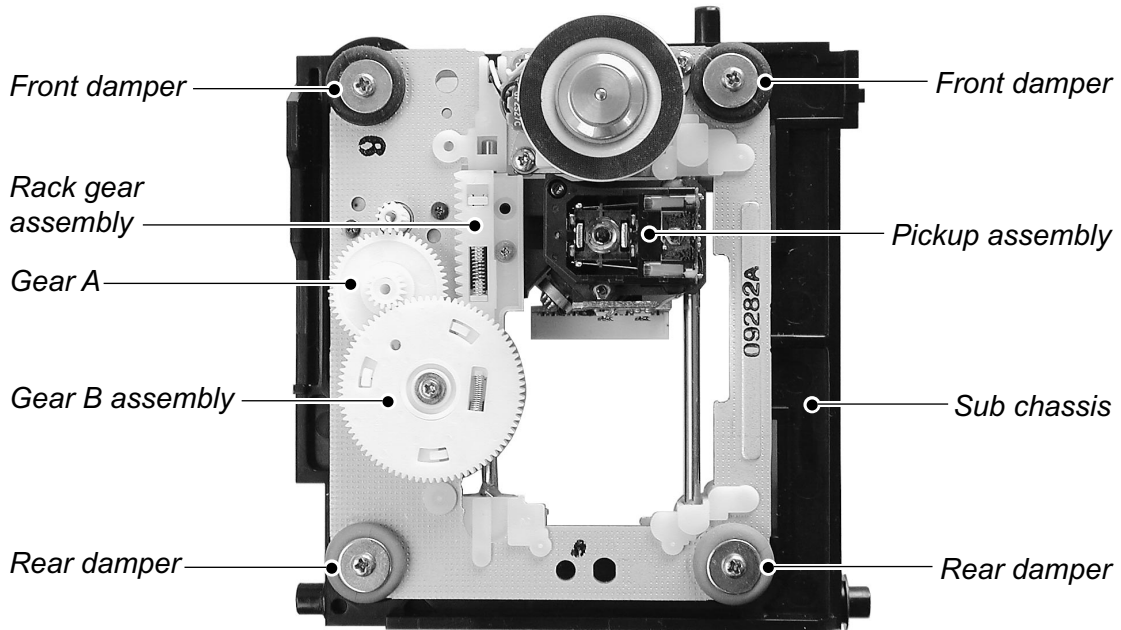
Mechanism chassis assembly (Internal side)
